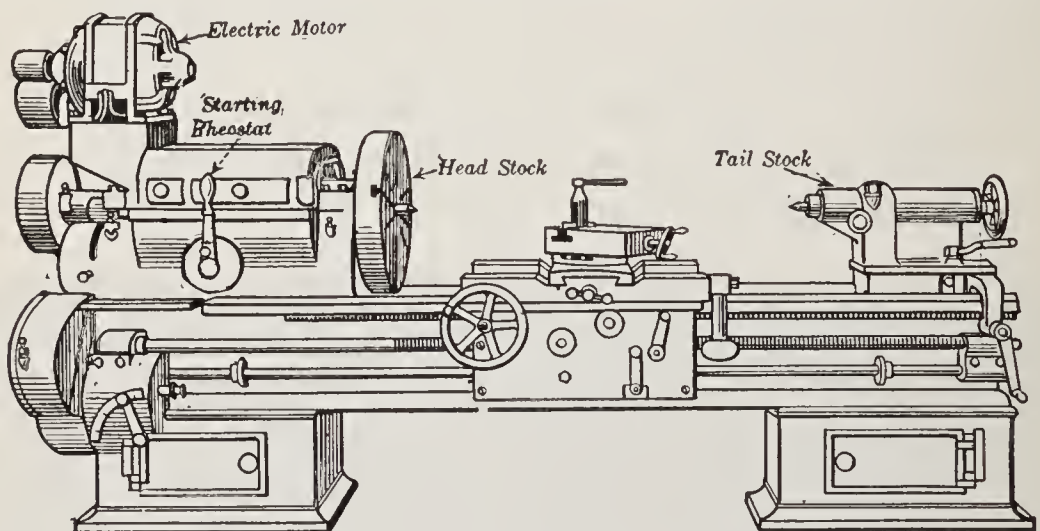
Machinist's lathe arranged to be driven by electric motor.
